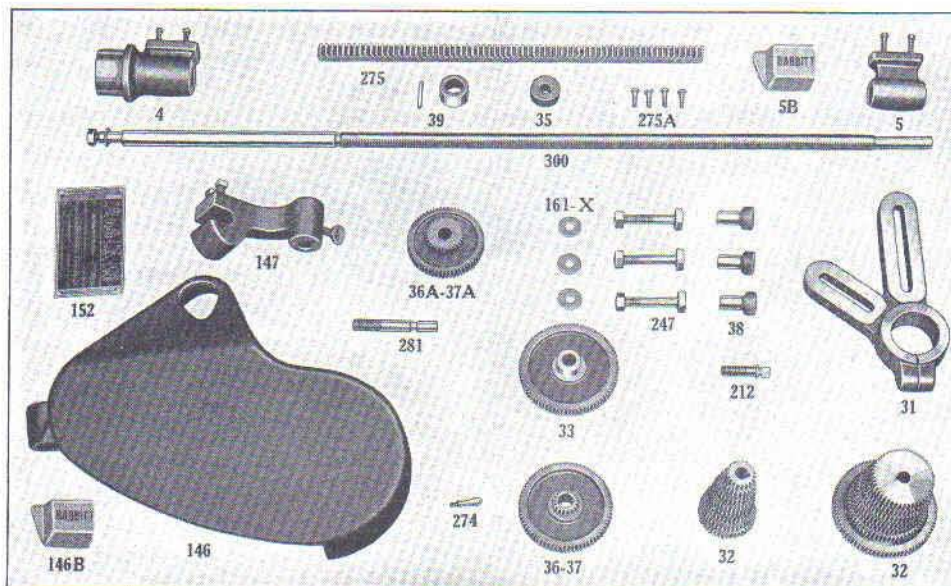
Standard Change Gear Parts for South Bend Standard Change Gear Lathes.
